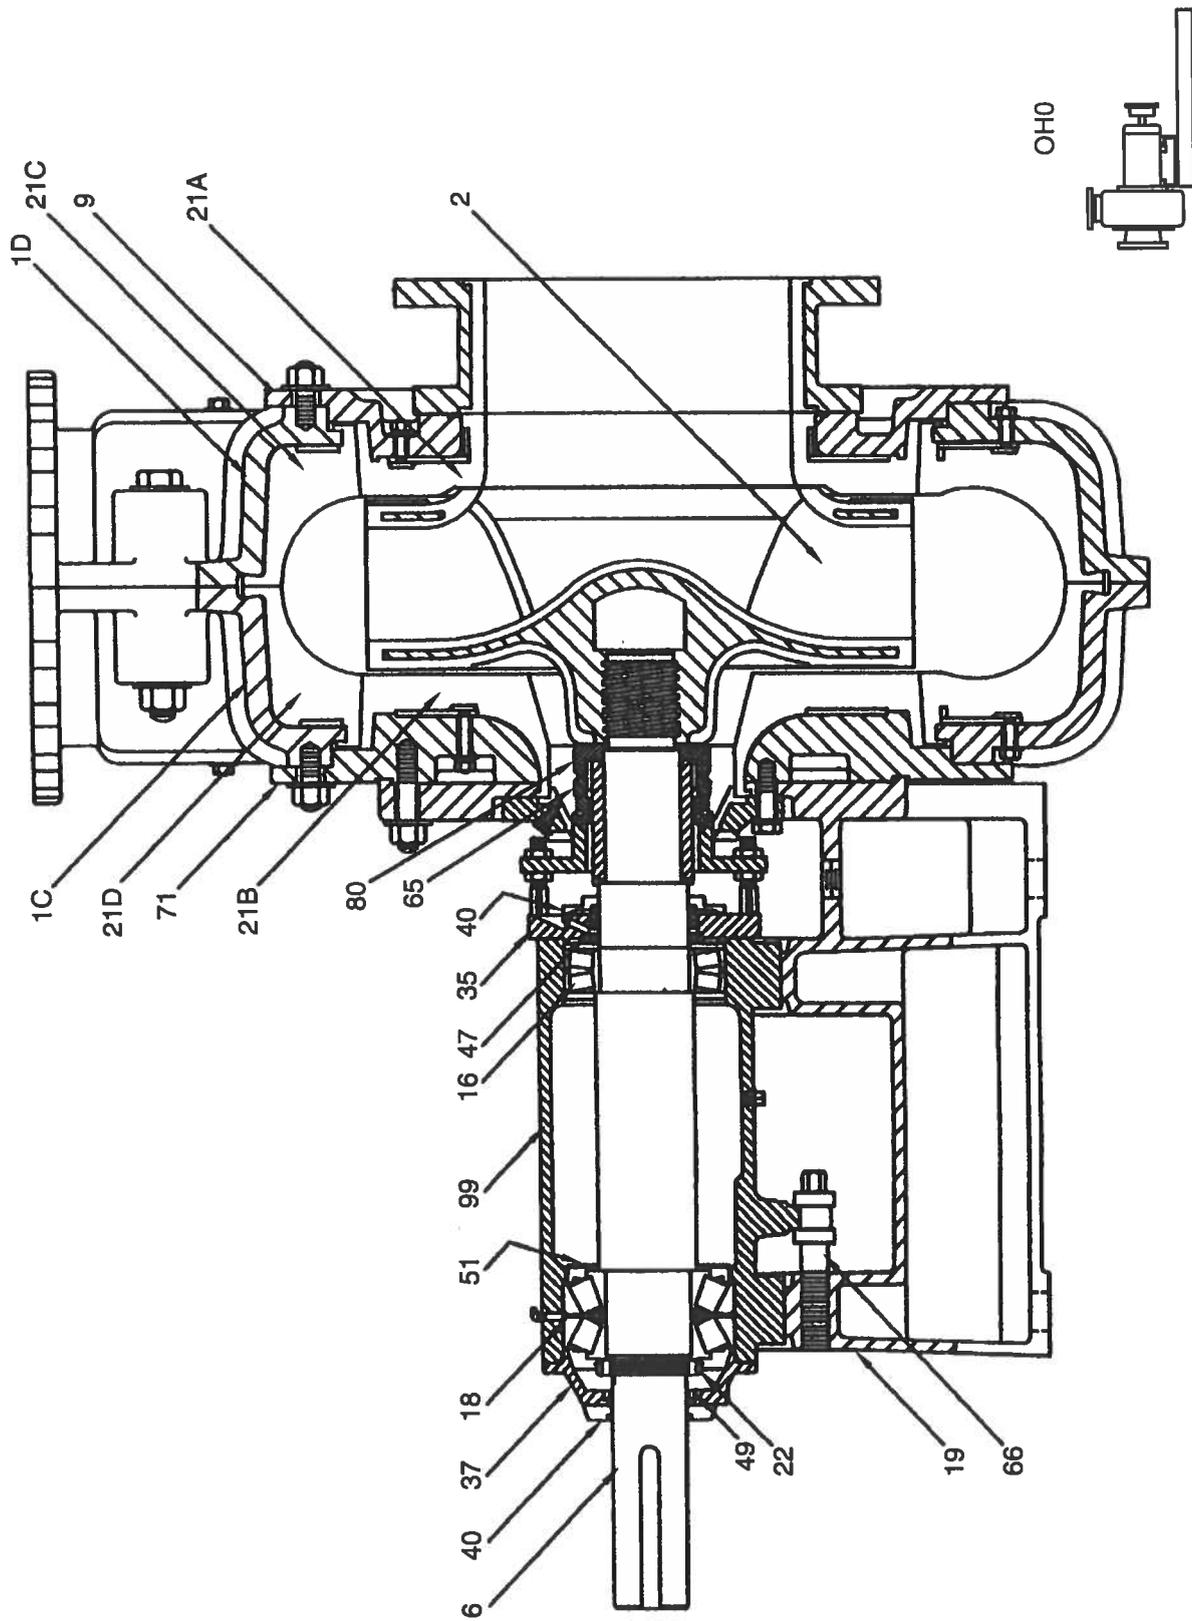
Overhung impeller – flexibly coupled – single stage – frame mounted – lined pump
